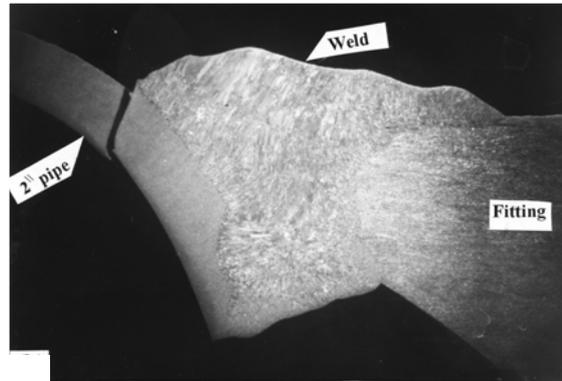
A cross section of leaked zone showing through-thickness crack with wider width at weld toe.
